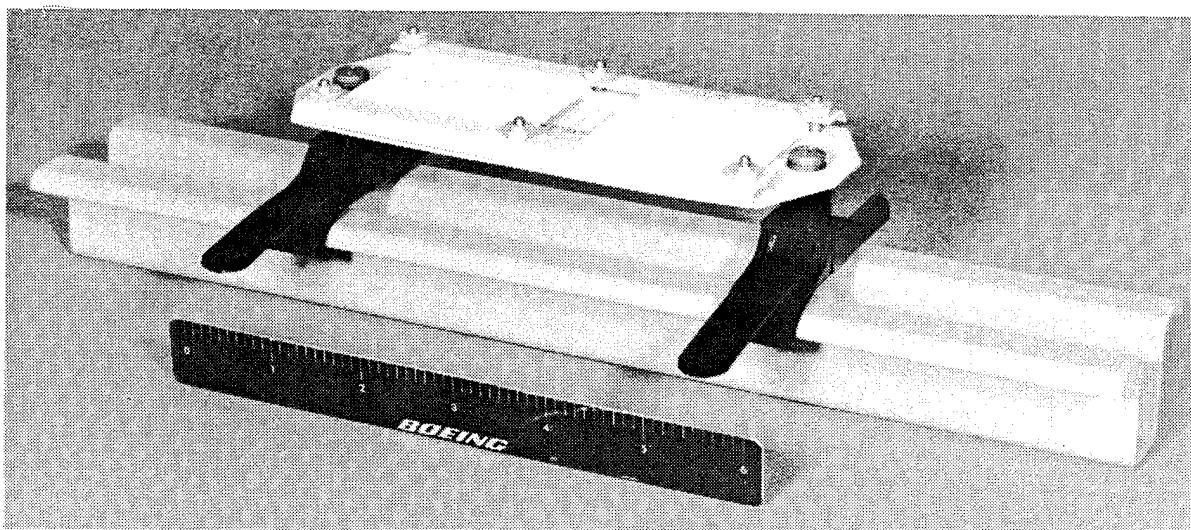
Interior Aircraft Shear and Flexure Specimen Fixture
